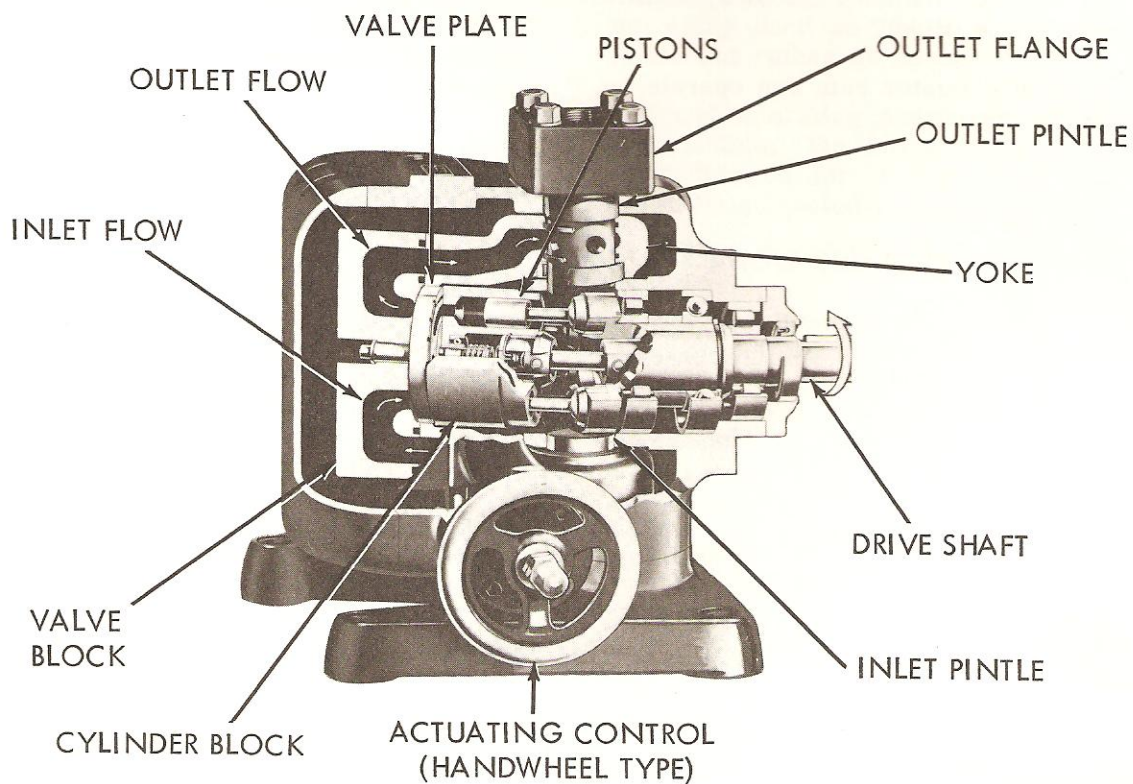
Typical Variable Displacement Bent-Axis Piston Motor
